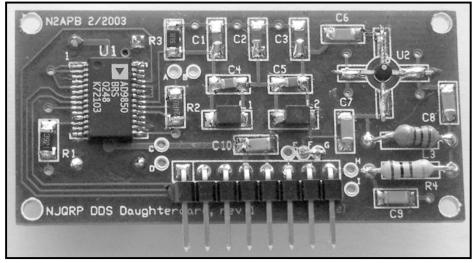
The fully-populated DDS Daughtercard pc board contains a mix of SMT and thru-hole parts, showing how the packaging technologies can be used together.
